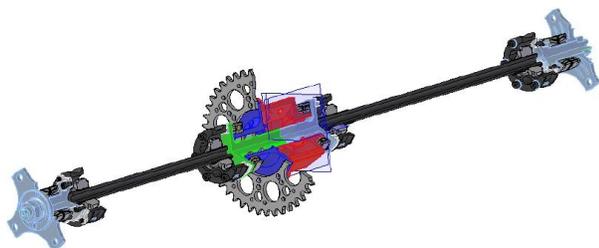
Schematic that shows the plan for the rear axle and sprocket system. From left, knuckle, wheel bearing assembly, left-side floating shaft, differential gear assembly, rear sprocket, right-side floating shaft, wheel bearing and knuckle are shown.
